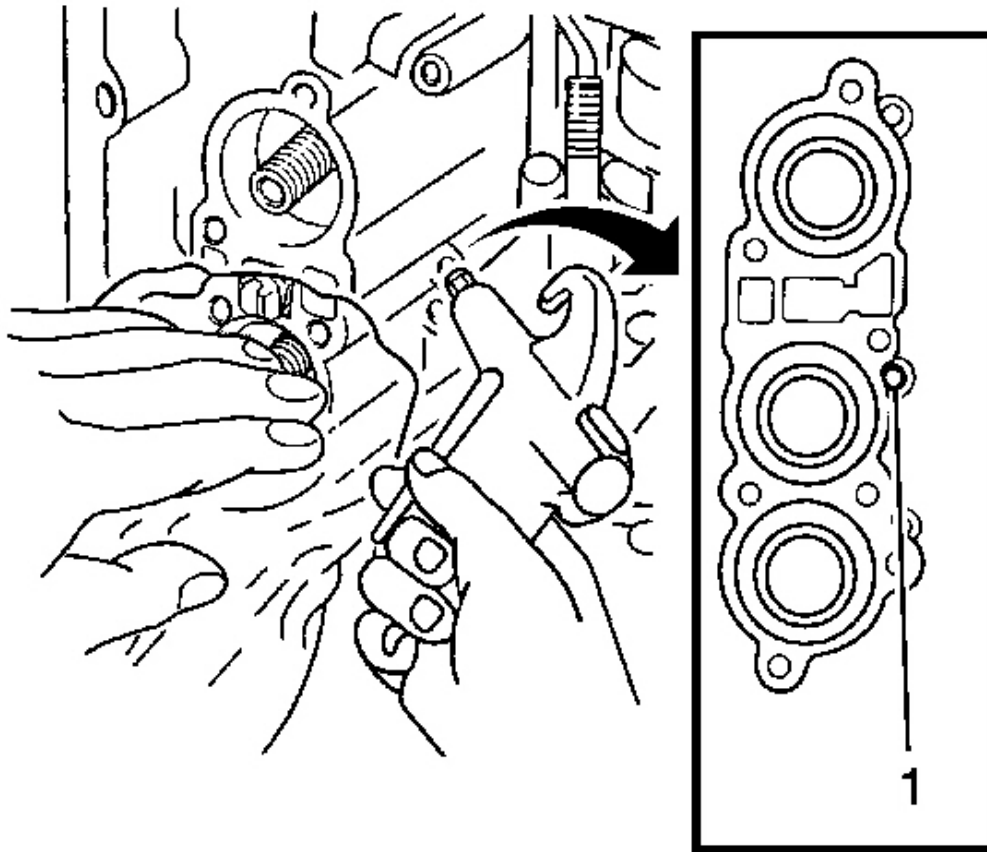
Applying Compressed Air To Oil Hole & Removing Forward Clutch Accumulator Piston & Spring.
